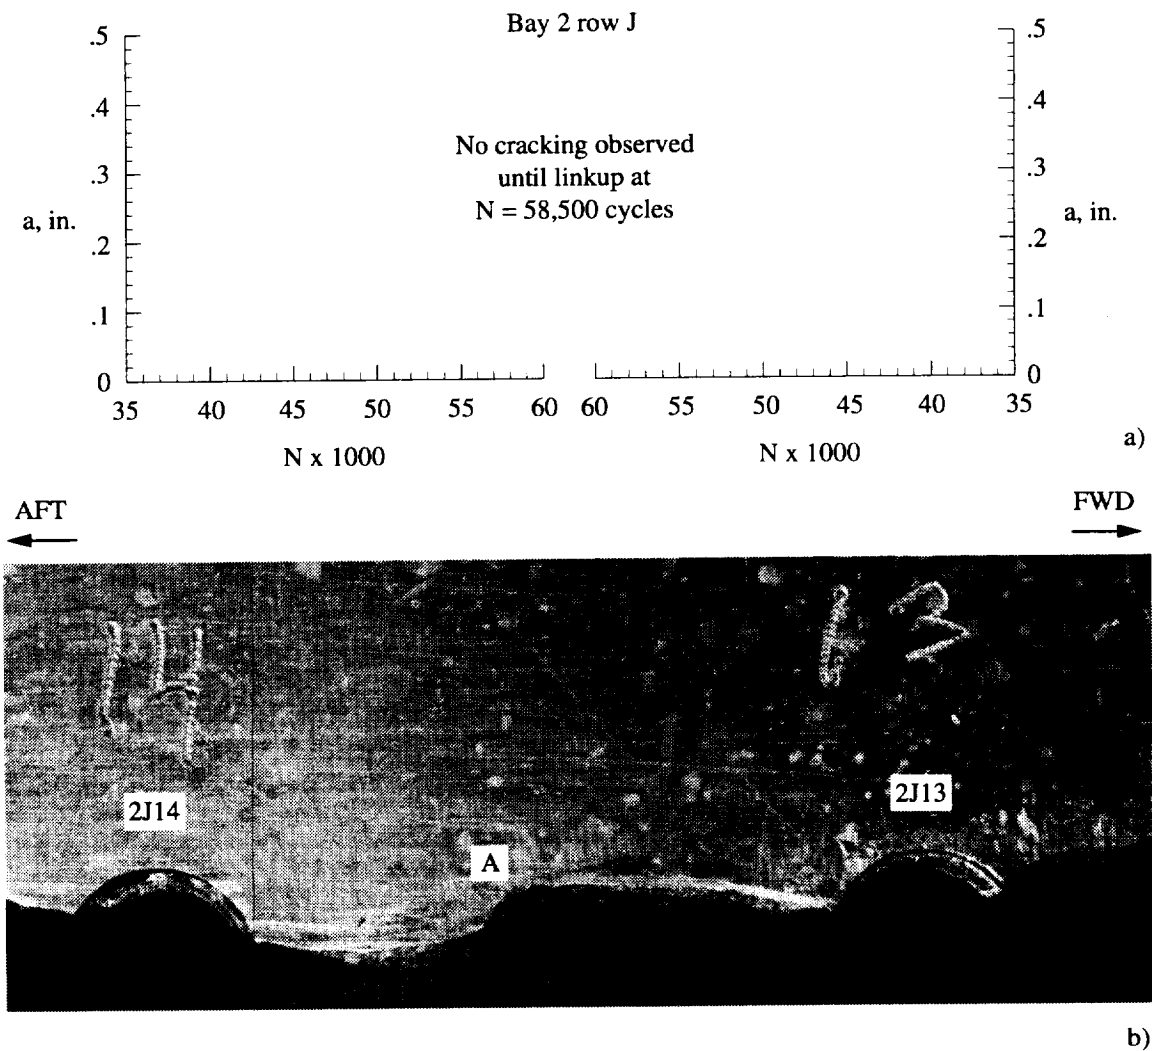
a) No visible cracks were observed between rivet holes 2J13 and 2J14 until after crack link-up. b) The photograph shows the upper portion of the crack surface between rivet holes 2J13 and 2J14. Region A is the likely location for crack link-up. Most of the crack surface shown in Figure 7.20.b exhibits a roughened appearance. This slant fracture region is characteristic of ductile tearing produced by relatively high crack tip stress intensity. The slant fracture region contains scratches normal to the direction of crack propagation indicative of fracture surface contact resulting from mode III displacement.
